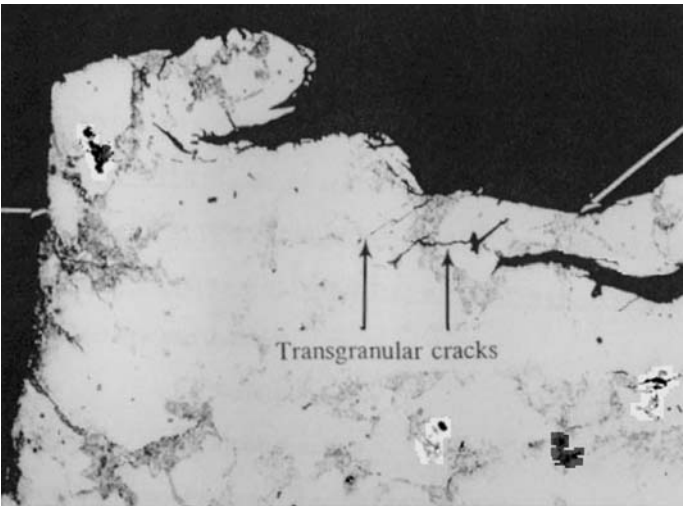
Metallographic cross-section of screw holes shown in Figs. 8.121 and 8.122, indicating stress corrosion cracking
